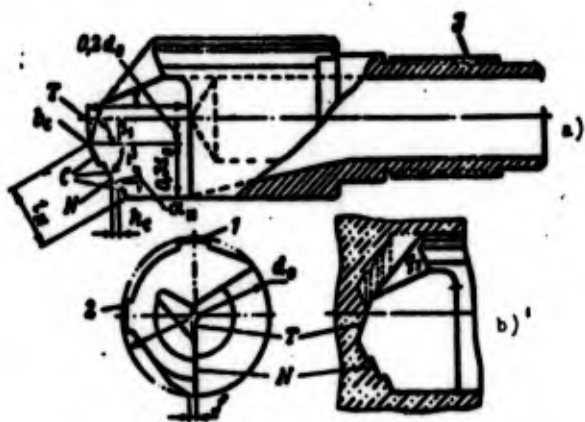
Bladed drill for deep drilling: 1, 2 - keys; 3 - shank.
